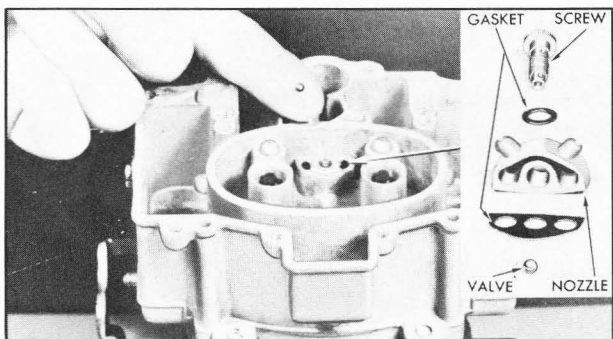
Installing Check Valve Ball and Pump Discharge Nozzle
